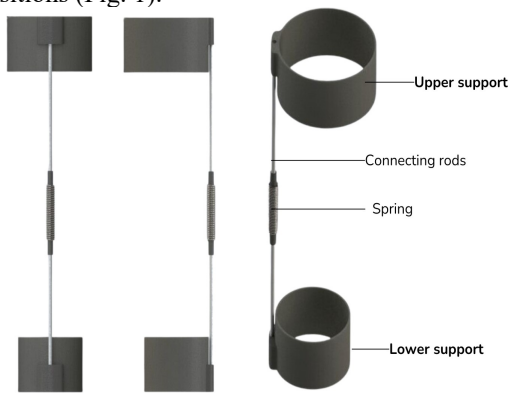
CAD model of the passive lateral knee-assist device showing the spring-based mechanism and attachment points.
